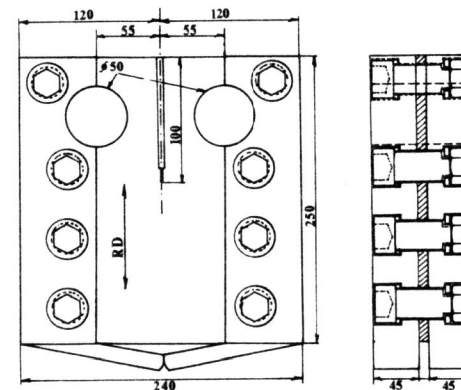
Eplsen - Specimen, Provided with Stiffeners Hinge
